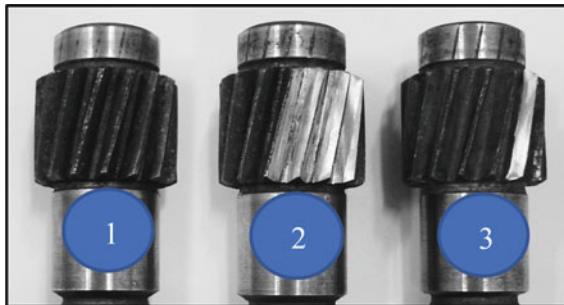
Gears: (1) no-fault gear, (2) worn tooth and (3) chipped tooth [13]
